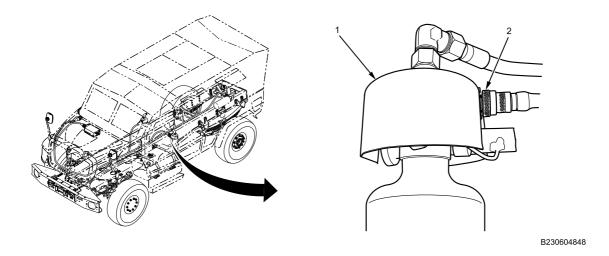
FSS Fuel Tank Extinguisher Cylinder Connection.
